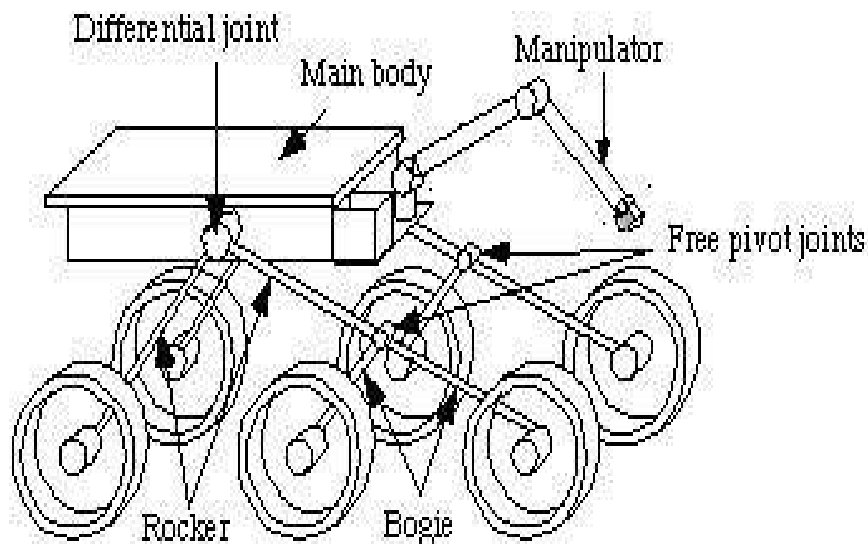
Three Dimensional view of Rocker Bogie Mechanism
